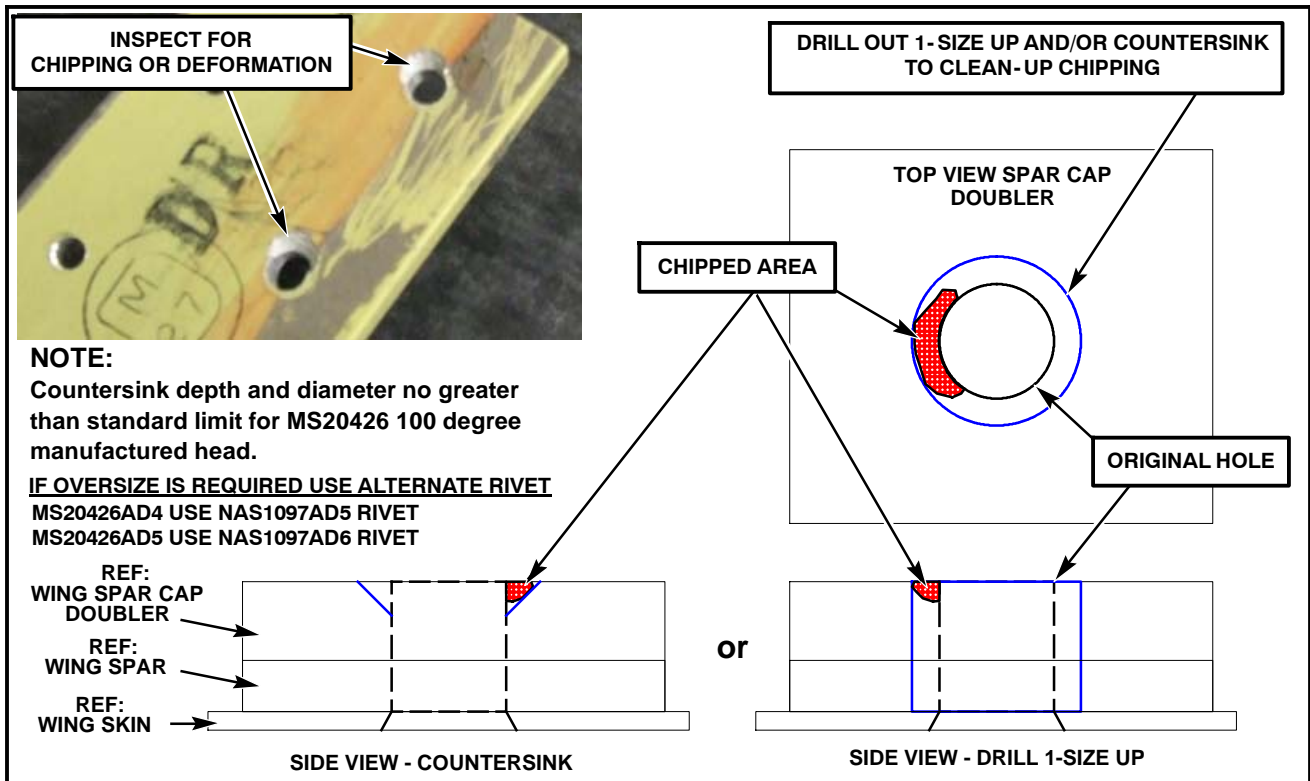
RIVET HOLE INSPECTION
